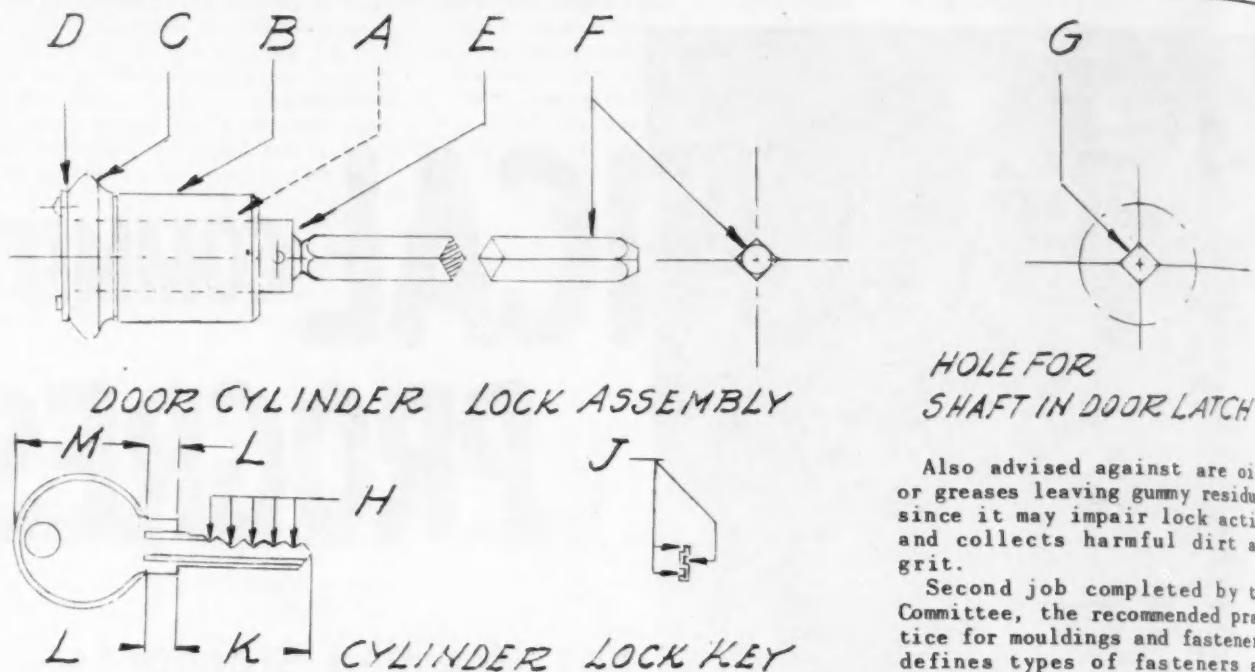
Cylinder lock and key nomenclature developed by the SAE Body Engineering Committee designates the following names for the above parts: A, plug; B, shell; C, brezel; D, key hole cover; E, joint; F, shaft; G, hole for shaft in latch; H, bitting; J, grooving; K, blade; L, shoulder; and M, bow
